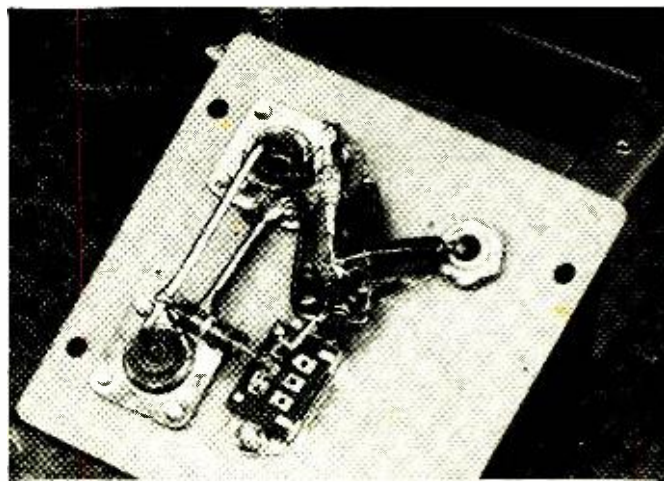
The construction of the detector is clean and simple. The 12-gauge copper wire mounted between connectors A and B should be kept at least ½" above the metal panel surface.
